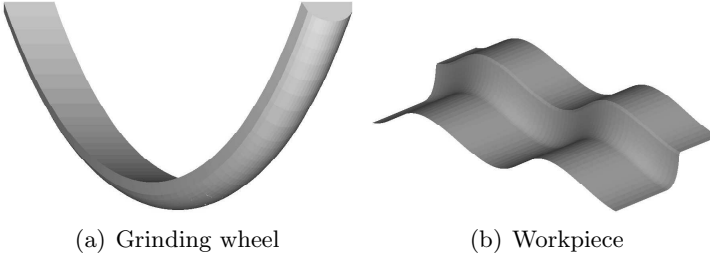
Geometry of the grinding wheel and the workpiece
